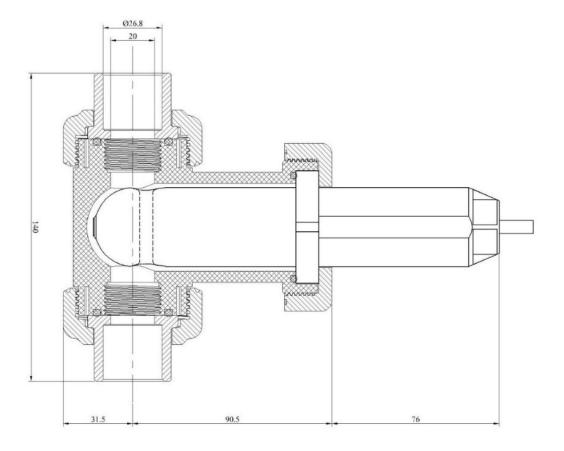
Dimension of the HM-500 Series probe and the ST-001 Tee Assembly (mm)
